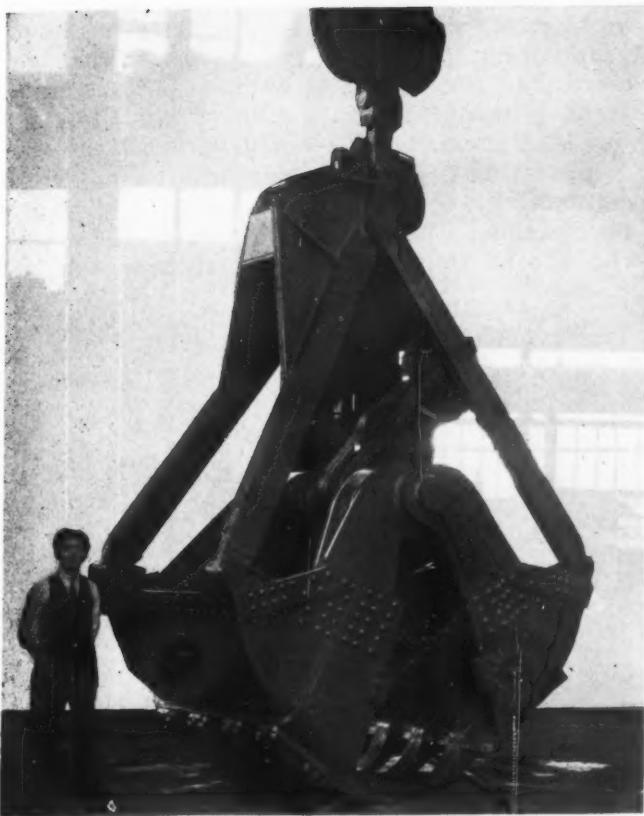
Dredging bucket for heavy duty is fabricated from Cromansil steel by welding, and normalized
